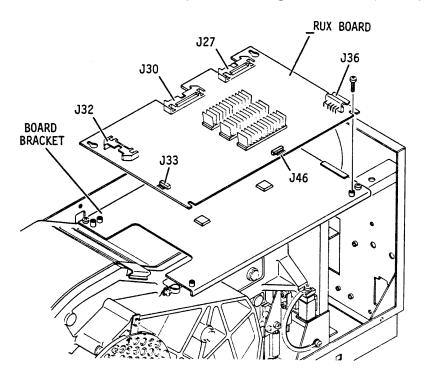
Read/Write Board (_RUX) Removal and Replacement
